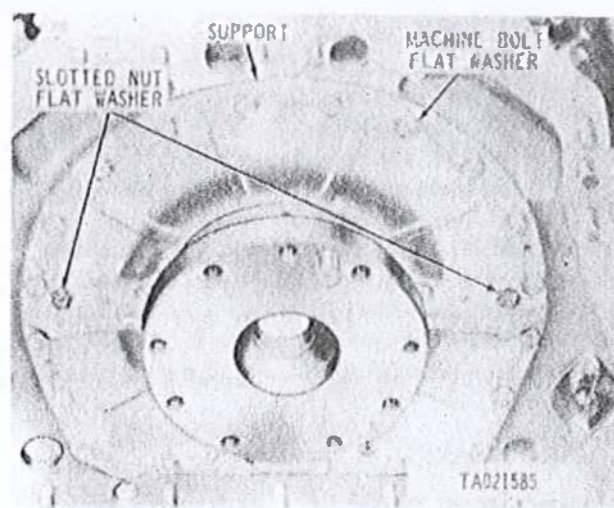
Removing or installing crankshaft oil seal cap and housing mounting bolts.
